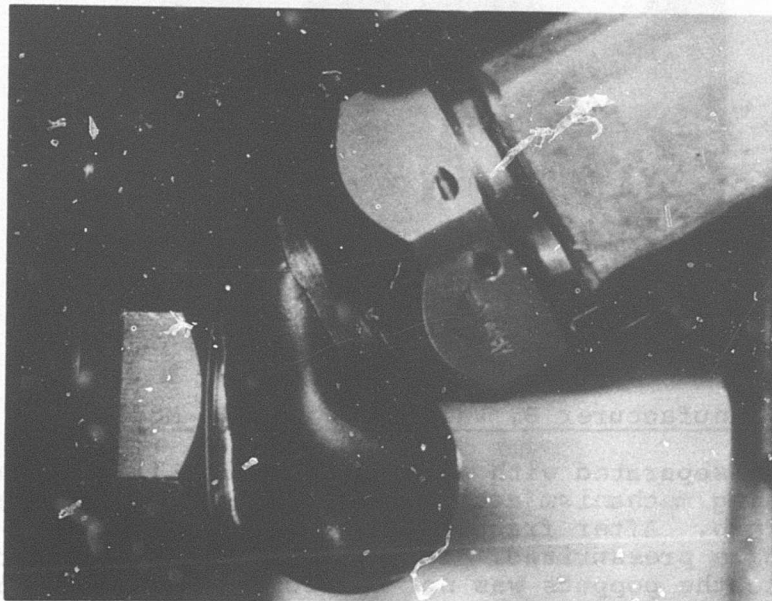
Bending Test, Valve 1, Prior to Boot Rupture.
